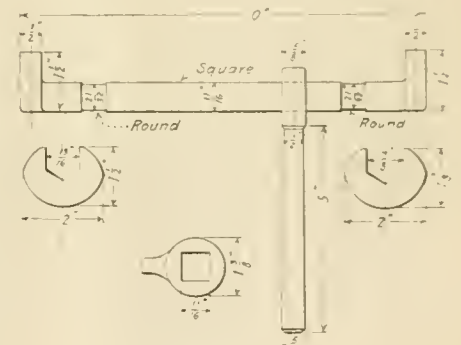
DETAILS OF BRAKE VALVE WRENCH.
